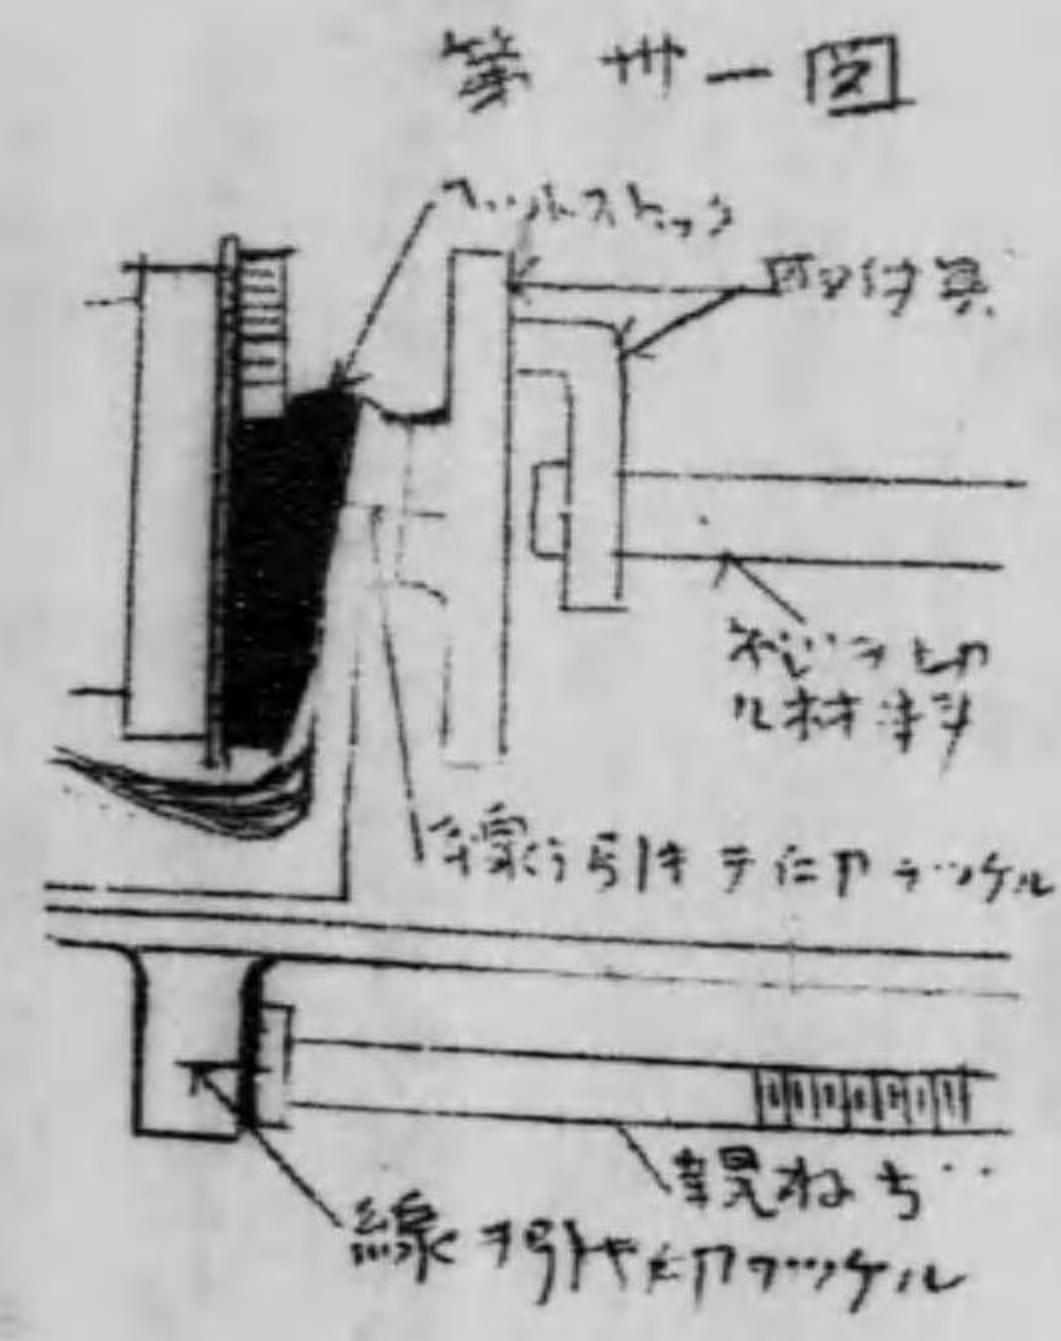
description: This diagram illustrates a mechanical drive mechanism. It features a vertical shaft (軸) connected to a gear (歯車) which is part of a larger frame (フレーム). A line (線) is shown passing through the mechanism. The text below the diagram explains the operation of this mechanism, detailing how it controls the movement of a workpiece (工作物) and how it is used to measure or control the amount of material being processed.
